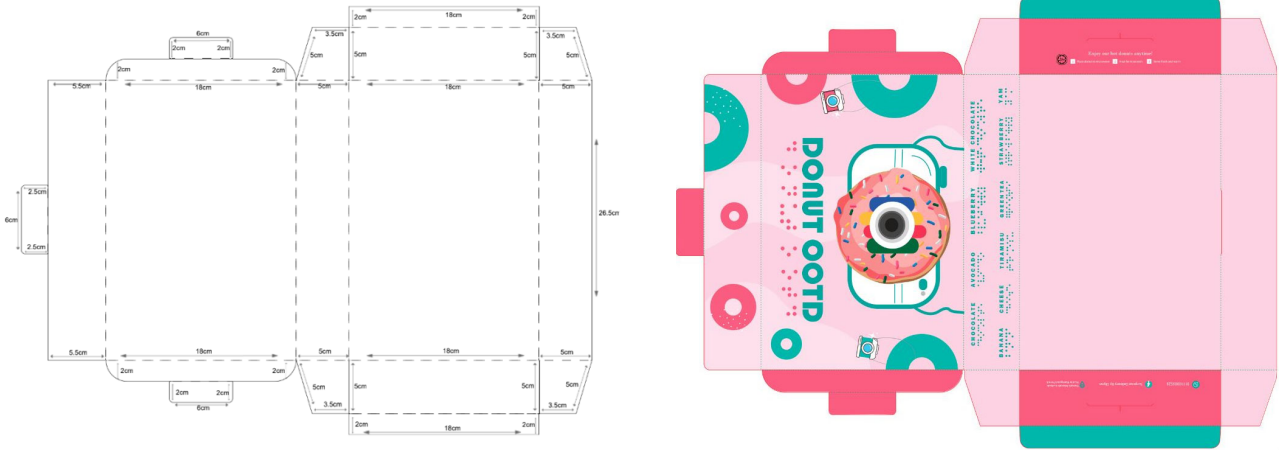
Technical Drawing(left) and Layout Design(right) for Donut packaging with Braille
